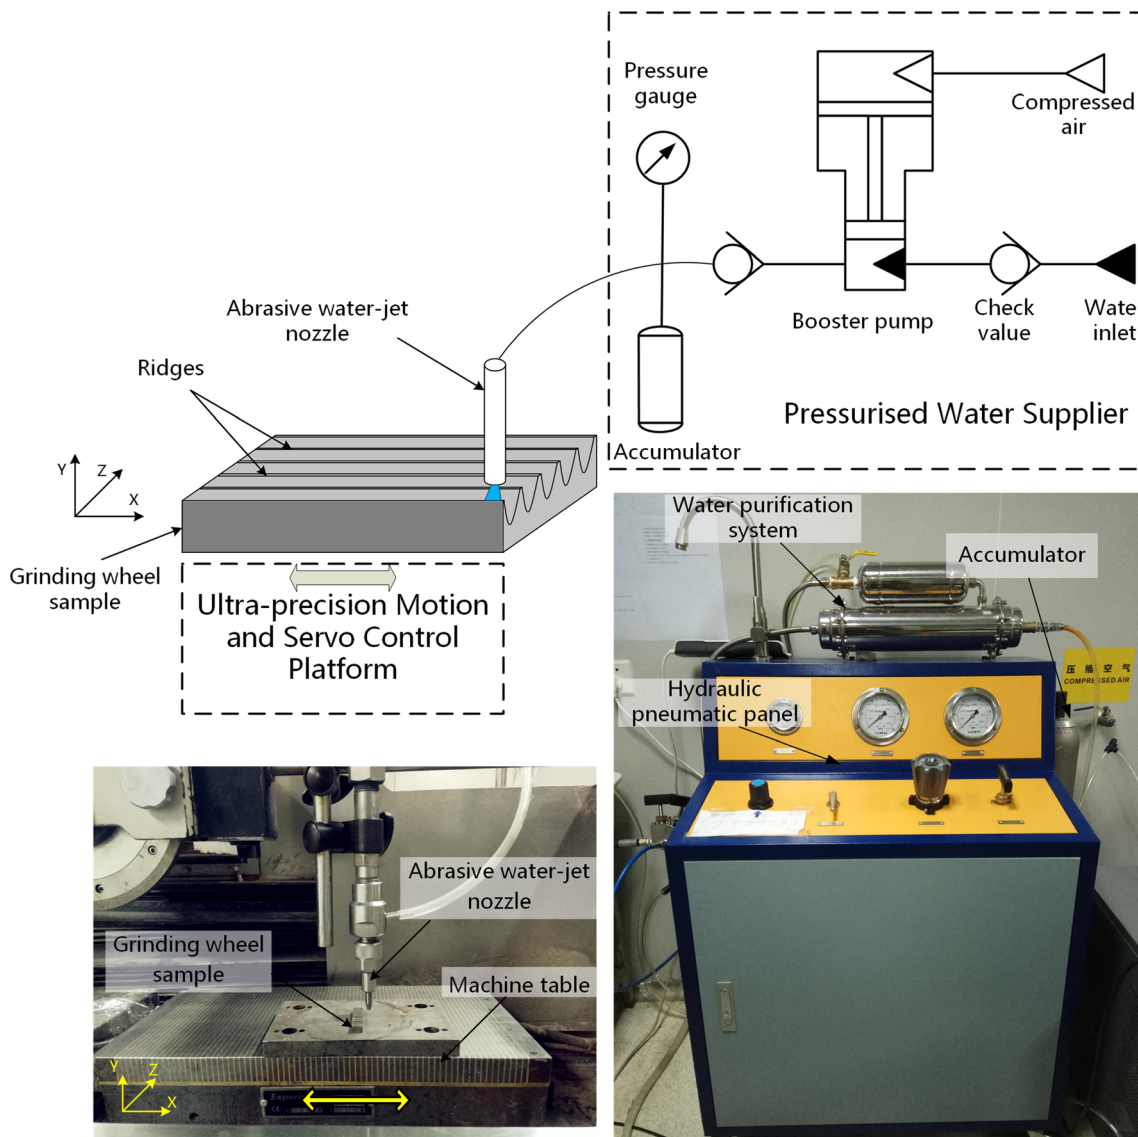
Schematic of the grinding wheel sample during abrasive waterjet texturing and experimental setup
